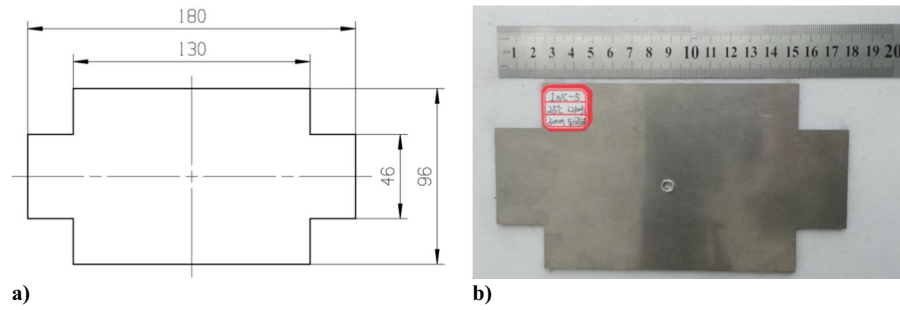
Inconel Specimen (unit: mm): (a) dimension; (b) photo after impact INC-5.
